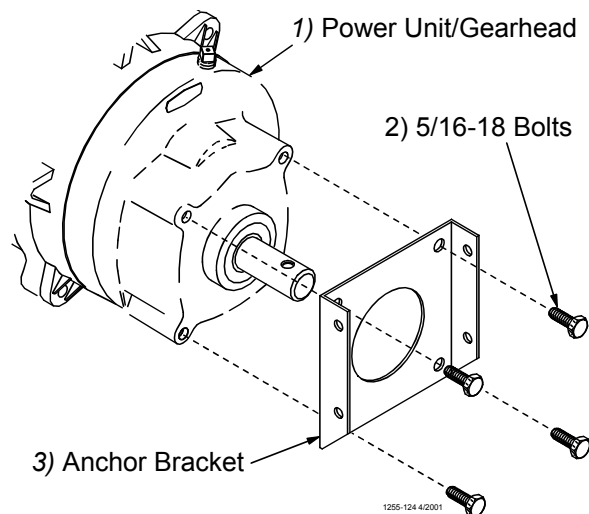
Assemble the Anchor Bracket to the Power Unit/Gearhead
